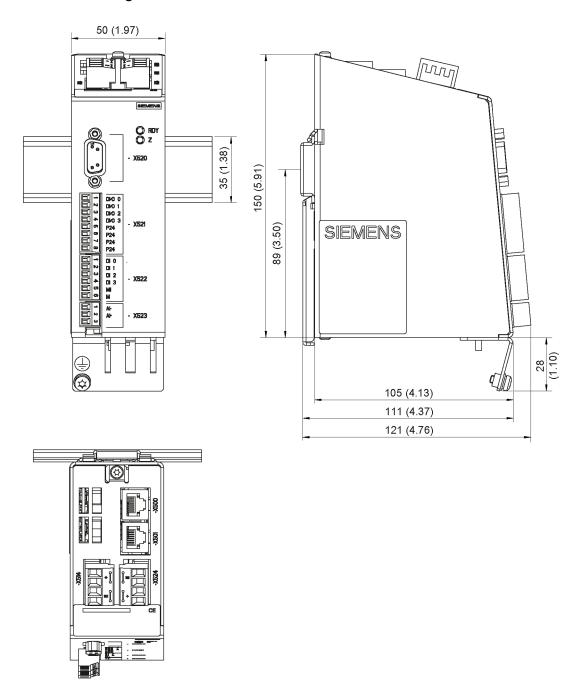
Dimension drawing of Terminal Module TM41, all data in mm and (inches)
